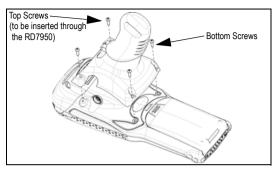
Pistol Grip Attachment To 7535 Hand-Held Computer
